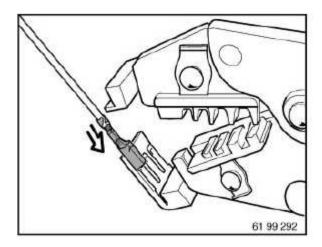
Attaching Wire With Contact Sleeve To Fan Connector Courtesy of BMW OF NORTH AMERICA, INC.
